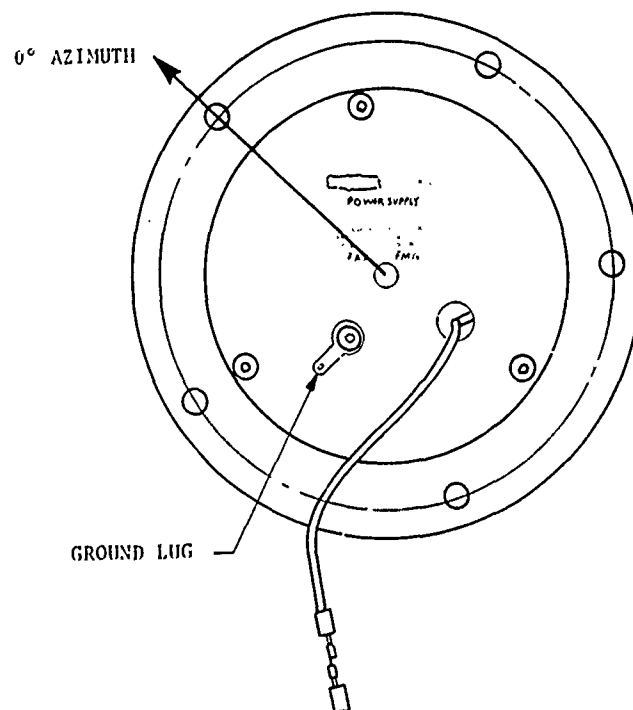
Bottom View of the SS-1 Strobe Lamp
